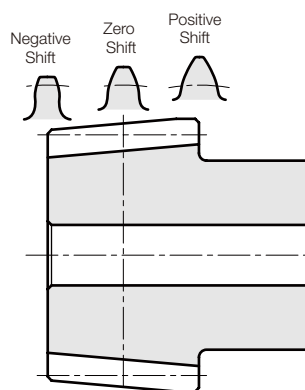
Tooth Profile of Tapered Spur Gear
